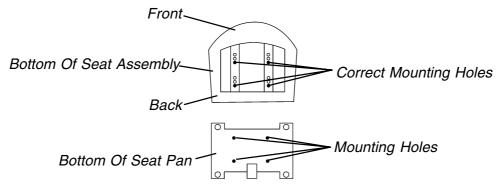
ADJUSTING THE SEAT DEPTH
